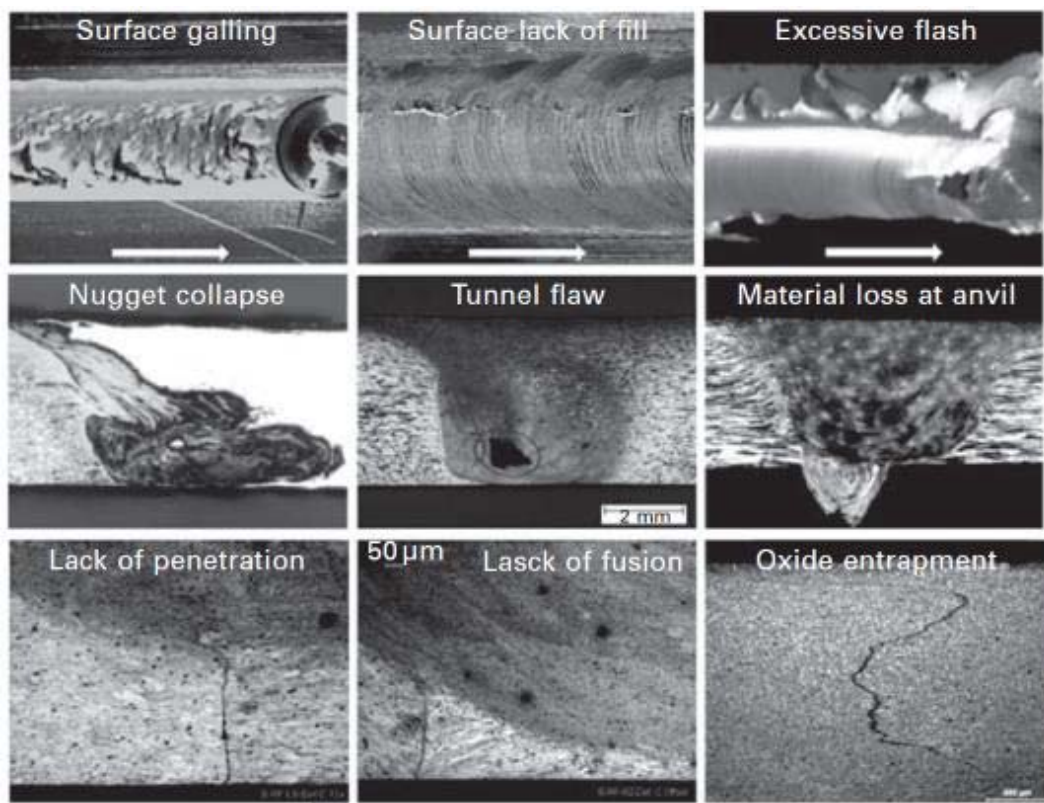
24 Defects in friction stir welds[104].
